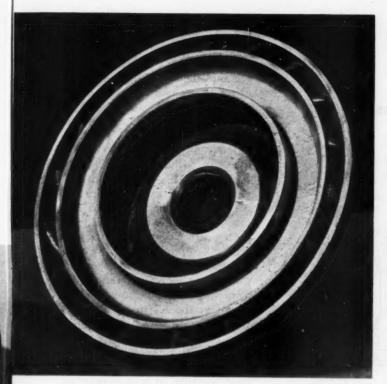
Cast aluminum runner for automotive torque converter with intricate passages and sharp-edge blades
